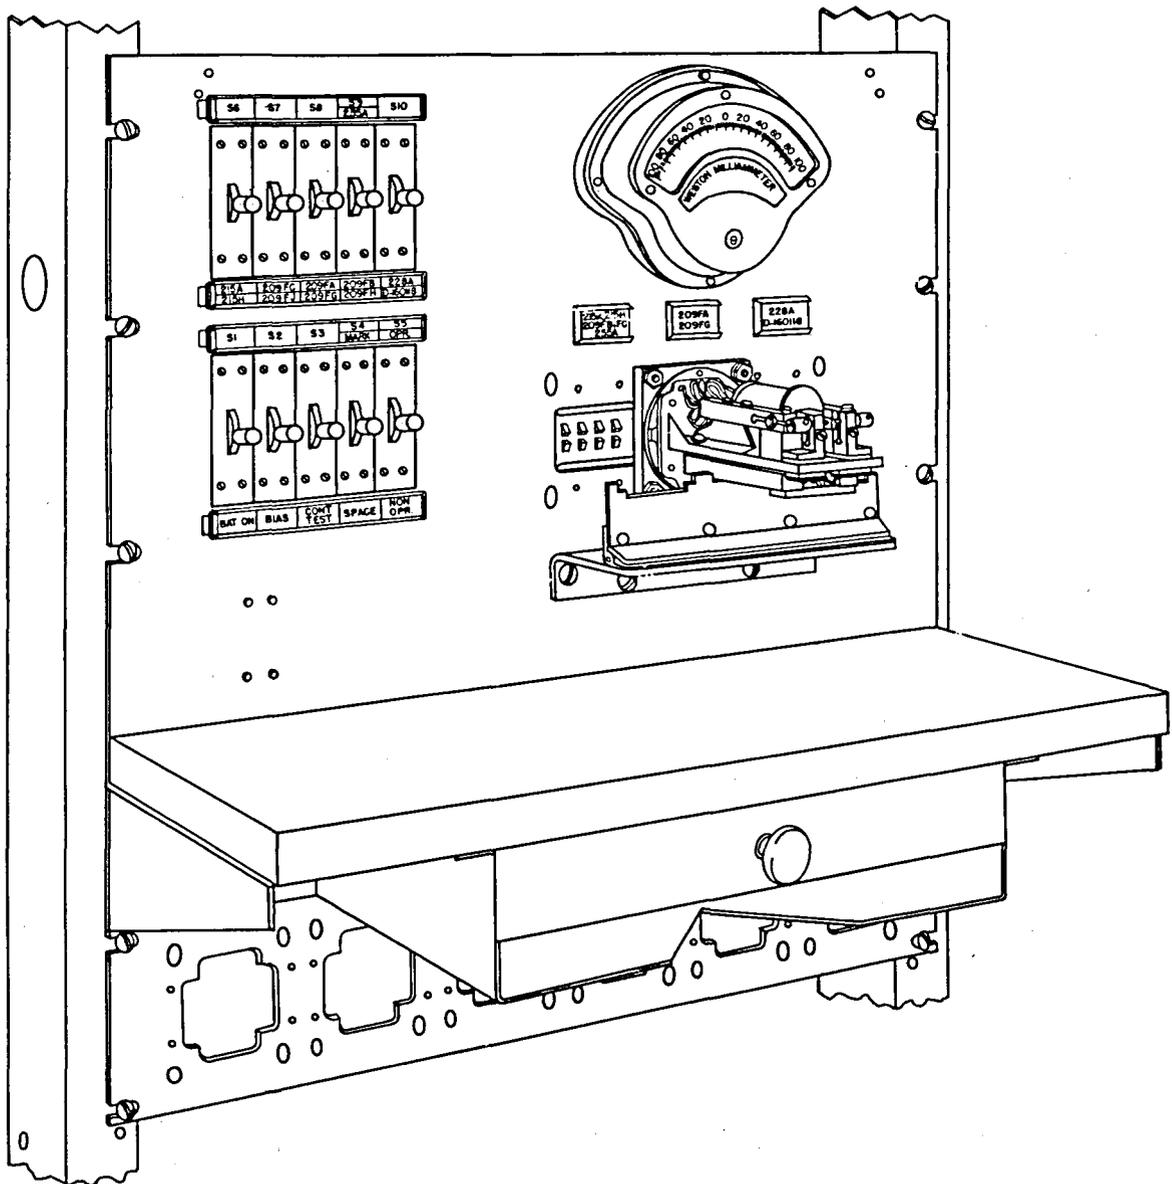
Front of Panel Mounted on a Relay Rack Bay with Shelf Assembly and Relay Storage Panel.
